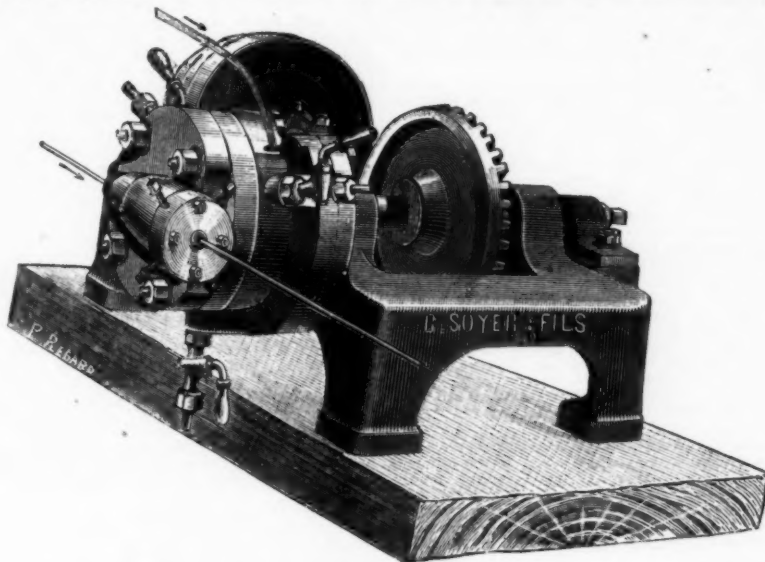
MACHINE FOR COVERING ELECTRIC WIRE WITH RUBBER.
